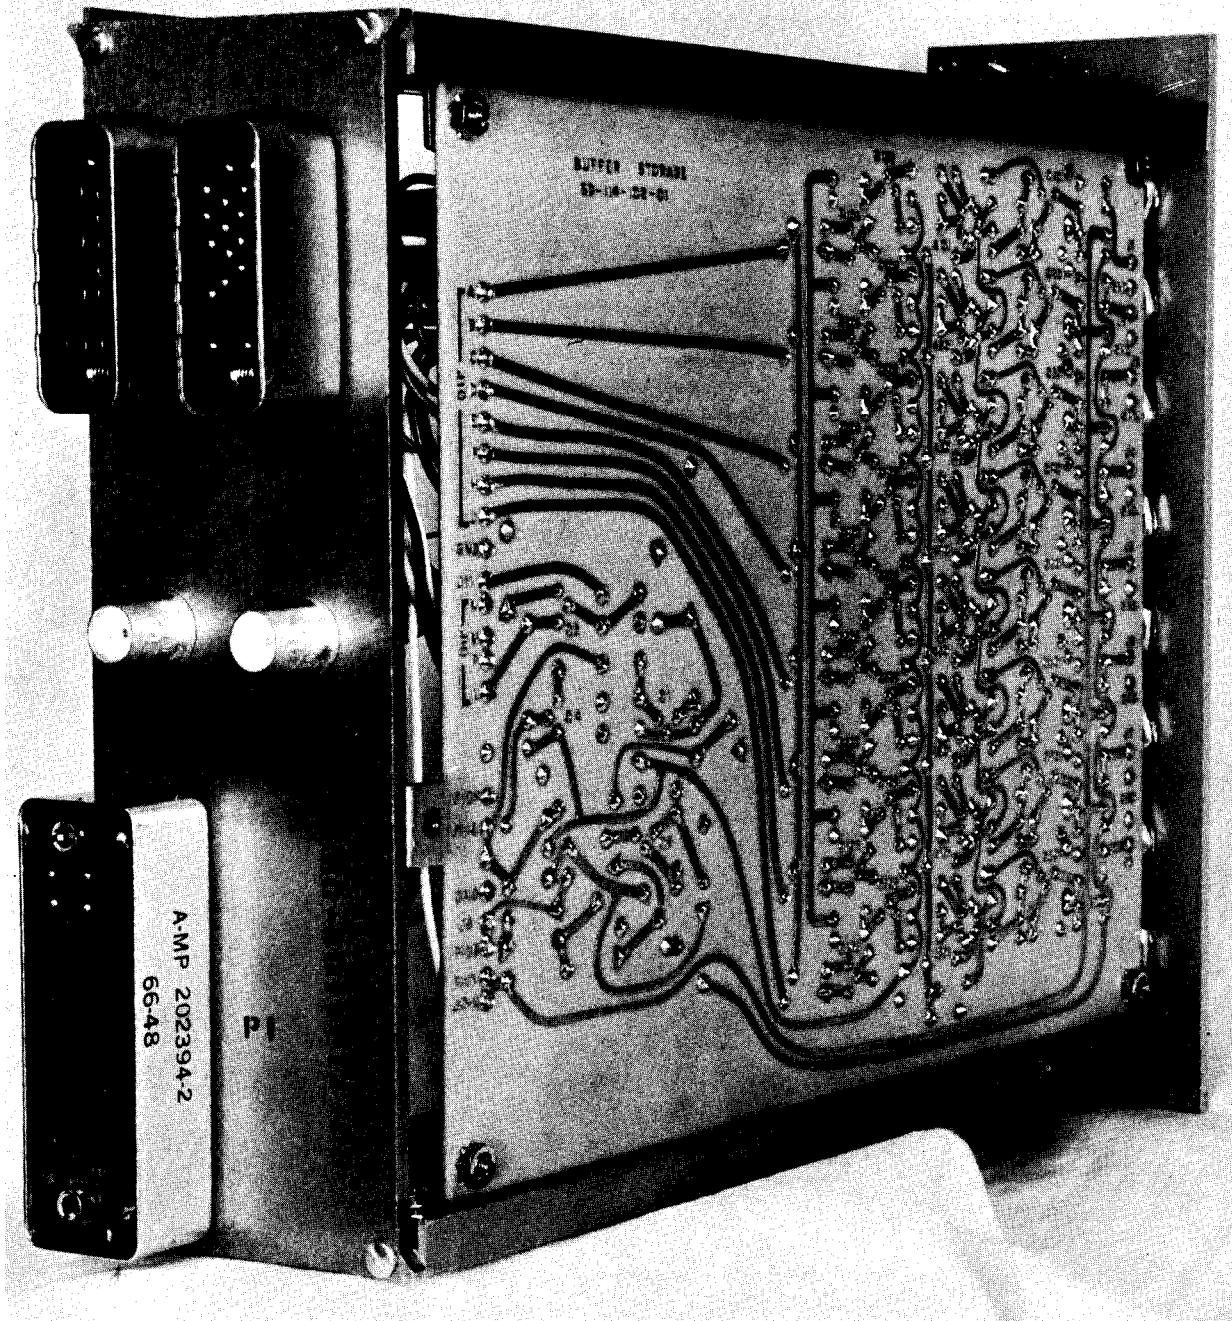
Rear oblique view of buffer storage unit (cover removed) showing etched wiring side of printed circuit board.
